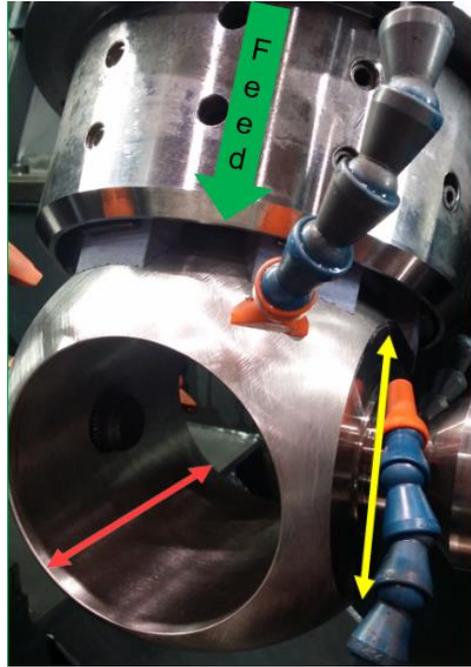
The dimensions that change with the ball diameter as the workpiece is ground.
